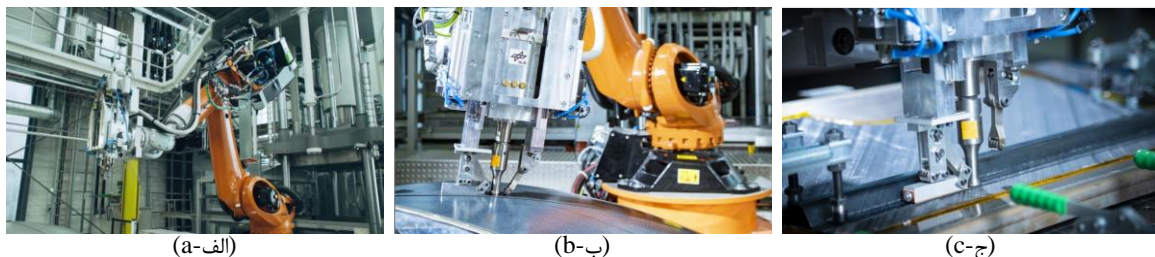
Continuous ultrasonic welding of composite hat stiffeners to aircraft fuselage by robot welder. (a): Overview of the welding robot. (b): The robot performing welding. (c): Close-up of the ultrasonic system assembly and weld consolidator. [20].
